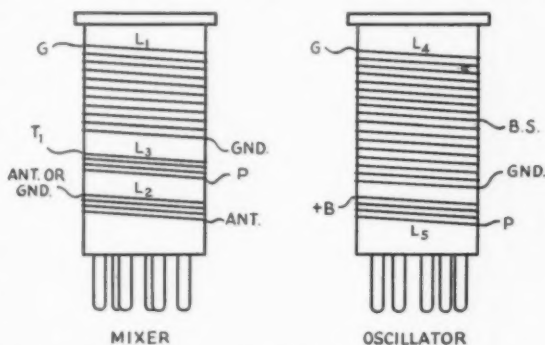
THIS DRAWING SHOWS THE METHOD OF WINDING THE MIXER AND OSCILLATOR COILS
